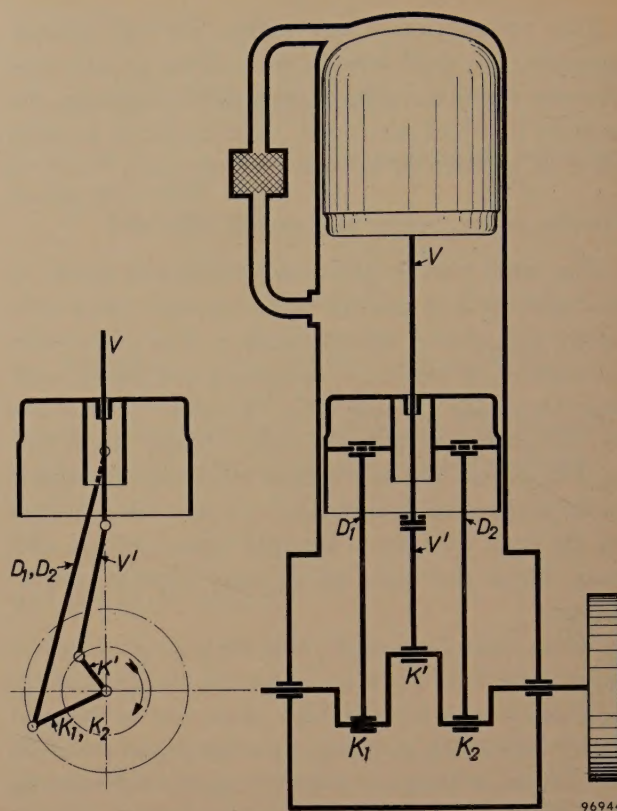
Drive mechanism used in the gas refrigerating machine. The piston has two parallel con-rods D_1 and D_2 which link it to cranks K_1 and K_2 ; between the latter is a third crank K' , which con-rod V' links to the displacer-piston rod V .
